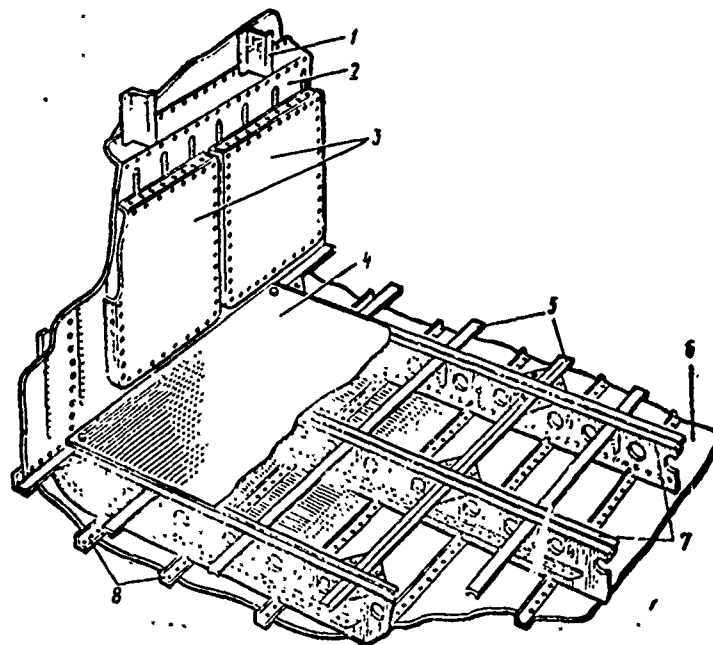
The floor construction of the cargo compartment: 1 - frame; 2- side panel; 3 - collapsible rigid seats; 4 - floor panel; 5 - longitudinal girders of the floor; 6 - duralumin covering; 7 - frames (transverse girders of floor); 8 - stringer.
